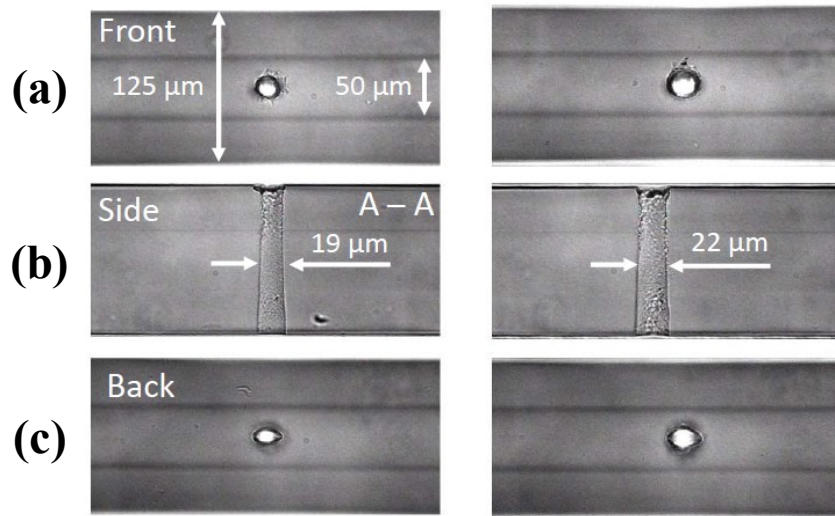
Micro hole fabricated by helical drilling in [4].
